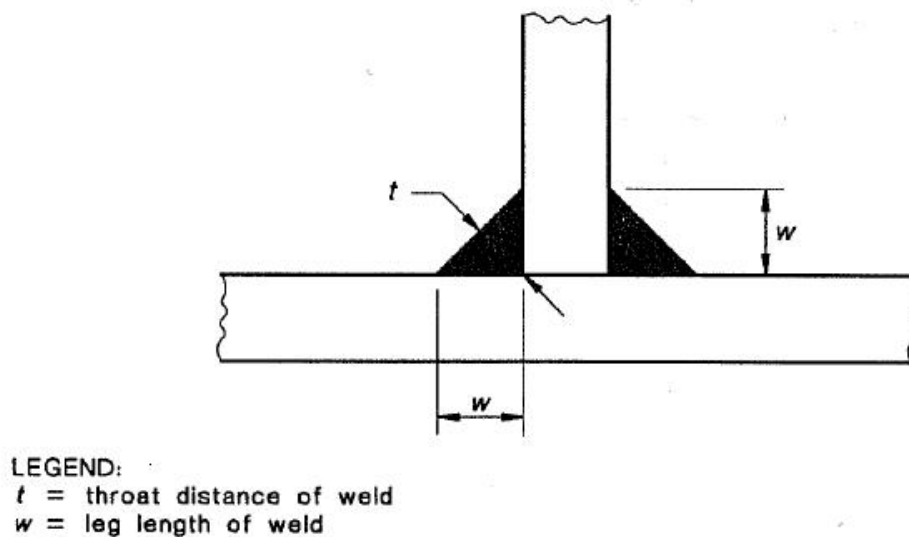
Dimensions of Intermittent Fillet Welds
